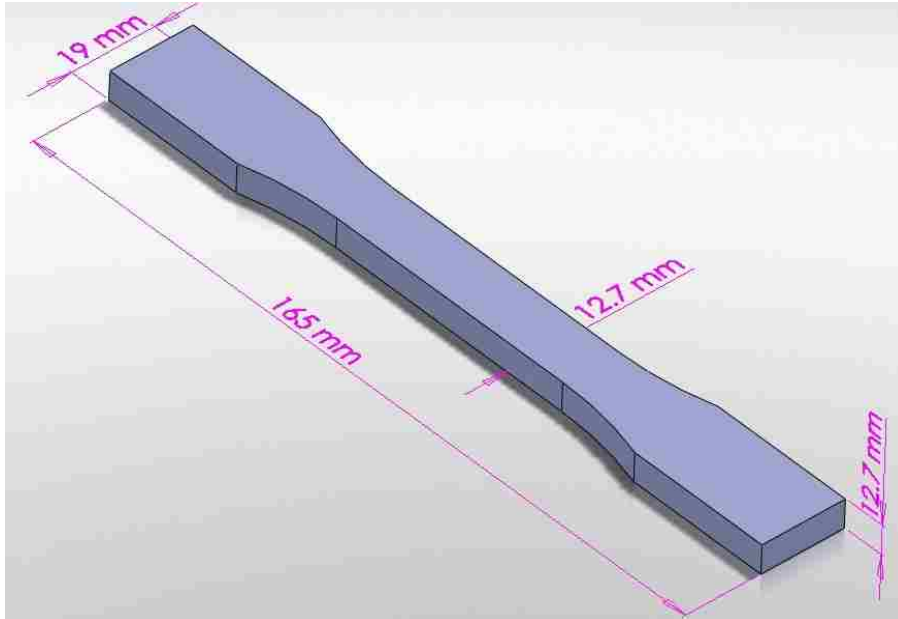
Isometric View of Tension Dog Bone. The major dimensions of the dogbone specimen used for tensile testing are shown.
